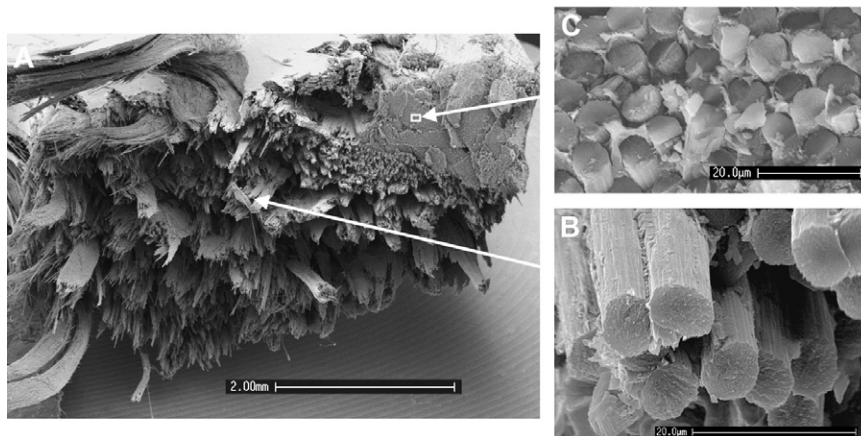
(A) Frontal view of half the fracture surface of a specimen after a destructive 4-point bending test. Upon implantation, the top surface would be in contact with the bone (compressive side) and the bottom surface face outwards (tensile side). The left-hand side of the image shows fibre bundles curved around a screw hole. Two different failure modes have occurred: compression and tension. (B) Close up of tensile failure on the fracture surface. (C) Close up of compressive failure on the fracture surface.
